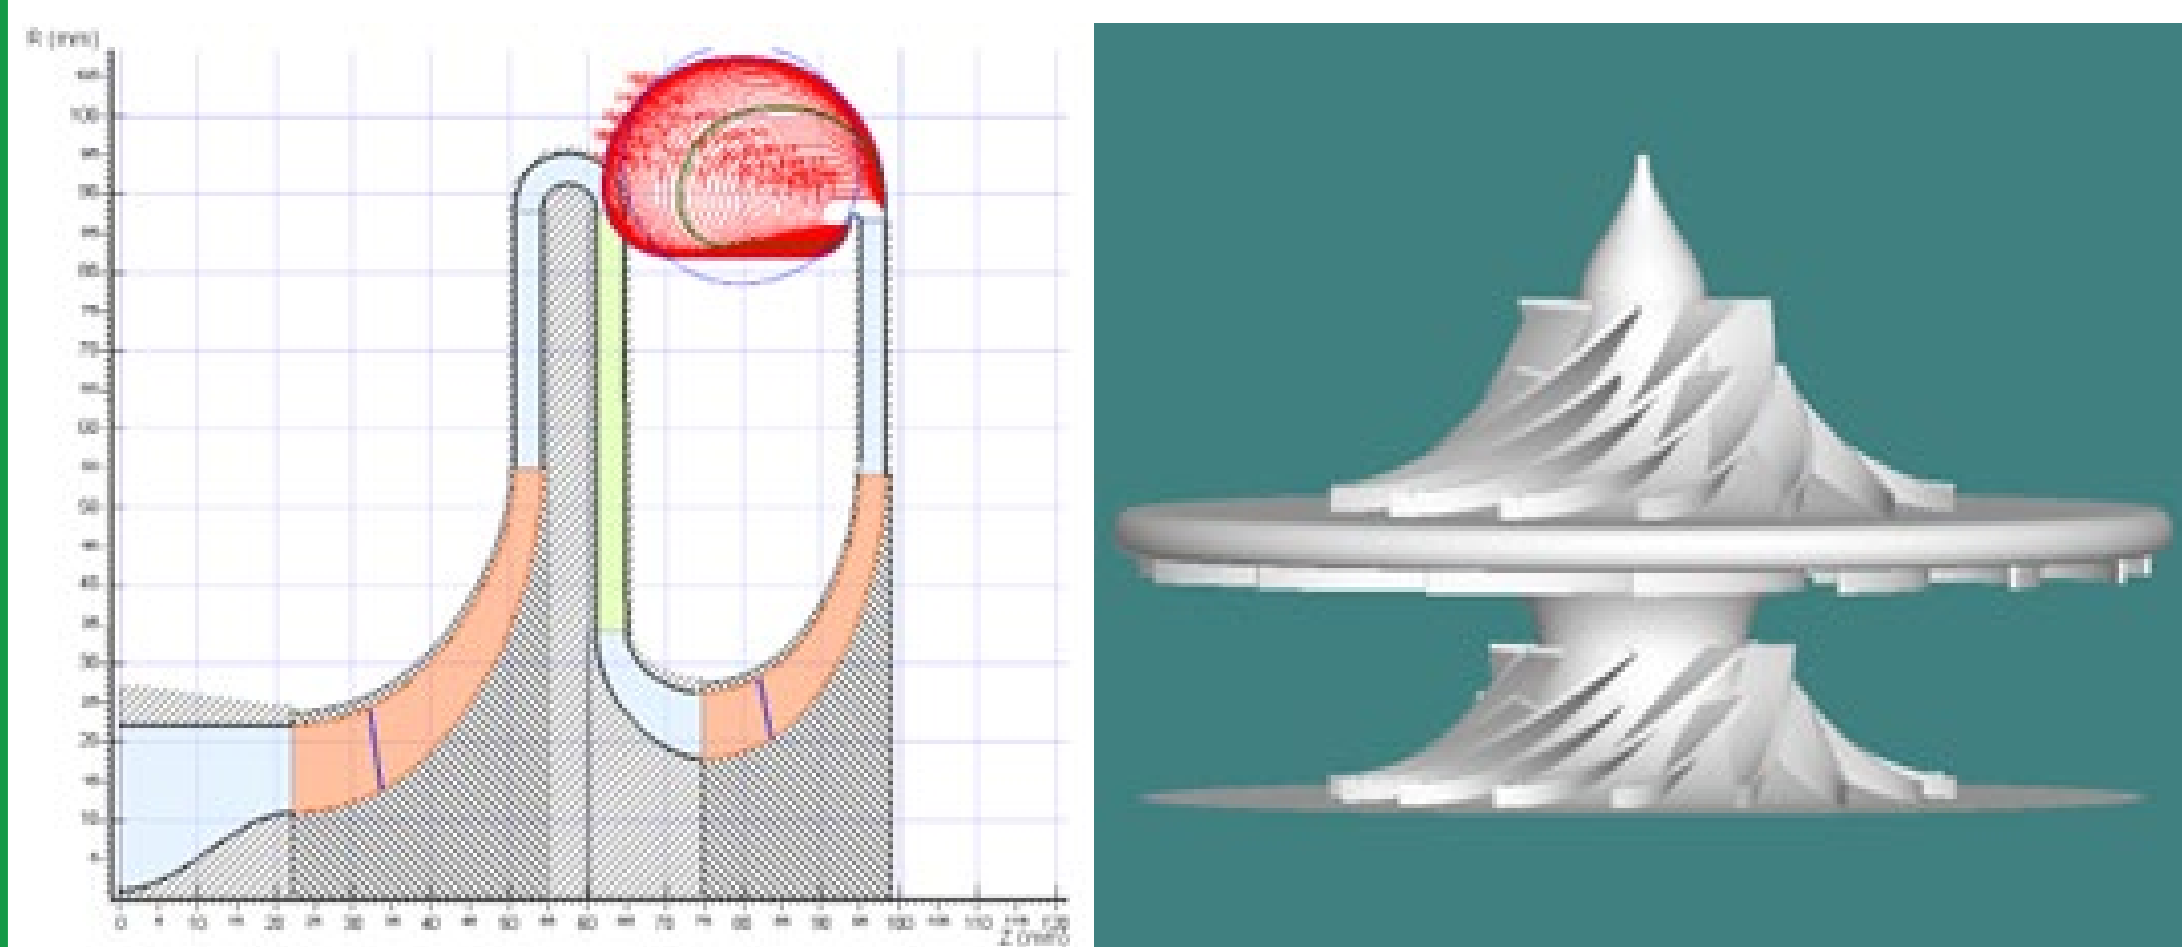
1D(left) and 3D(right) design diagram of centrifugal impeller
